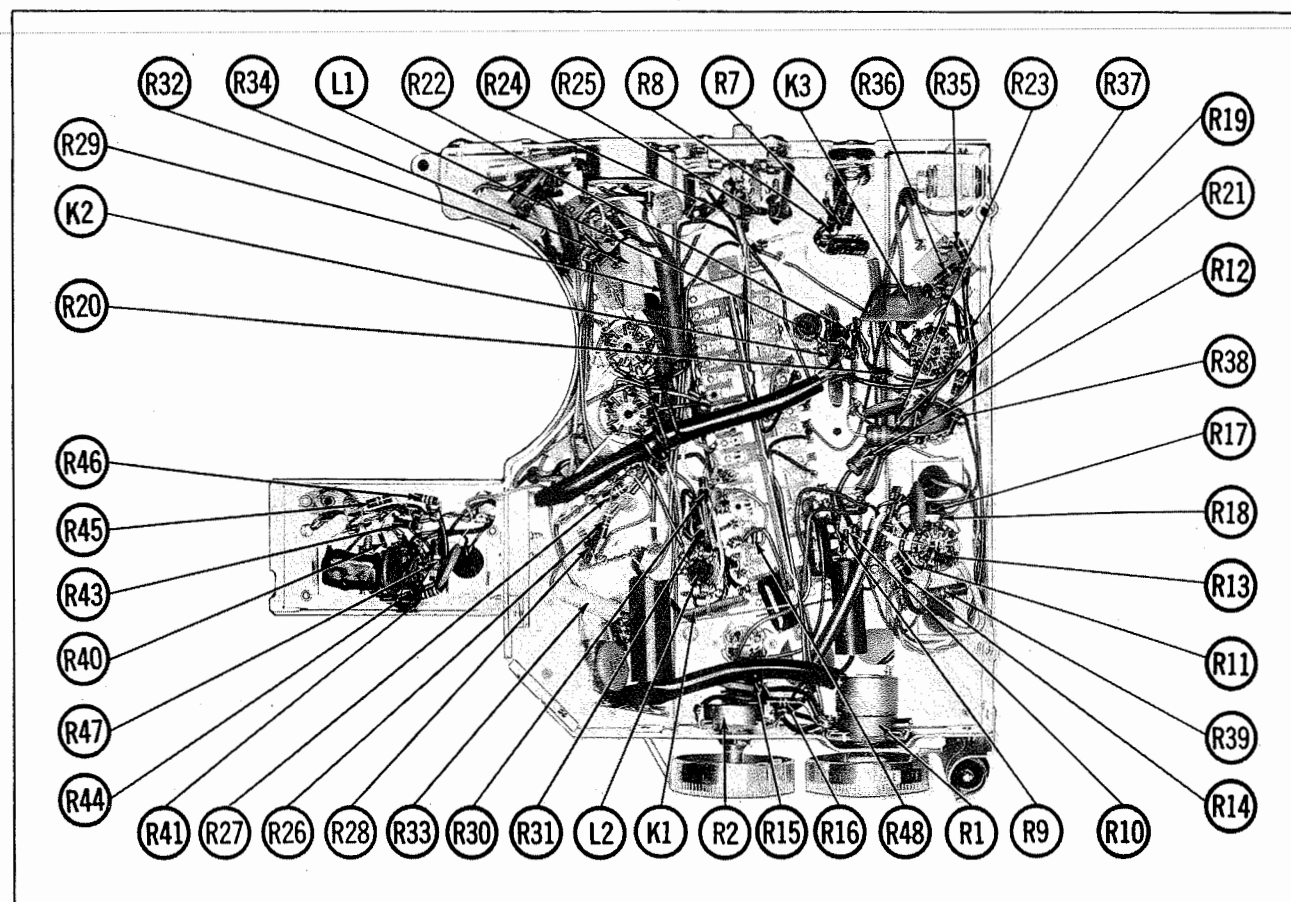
Bottom View of Amplifier Chassis-Resistor & Inductor Identification
